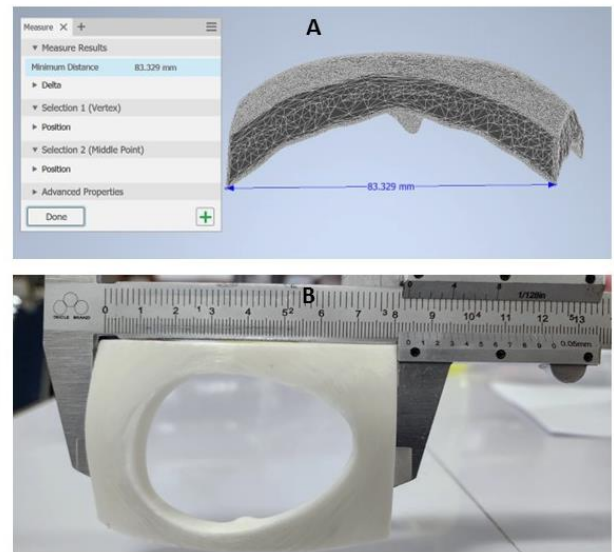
Accuracy evaluation on (A) Autodesk Inventor and (B) 3D printed prototypes using a digital caliper.
